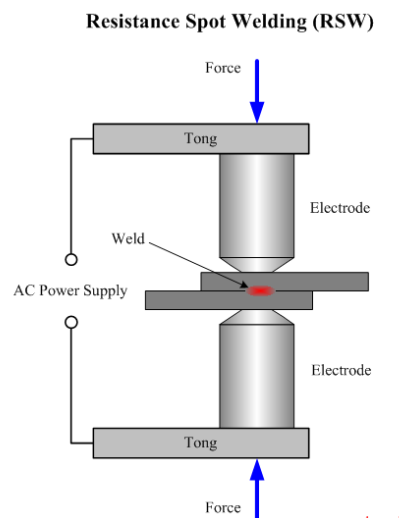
Principle of resistance spot welding (SubsTech, 2009)
